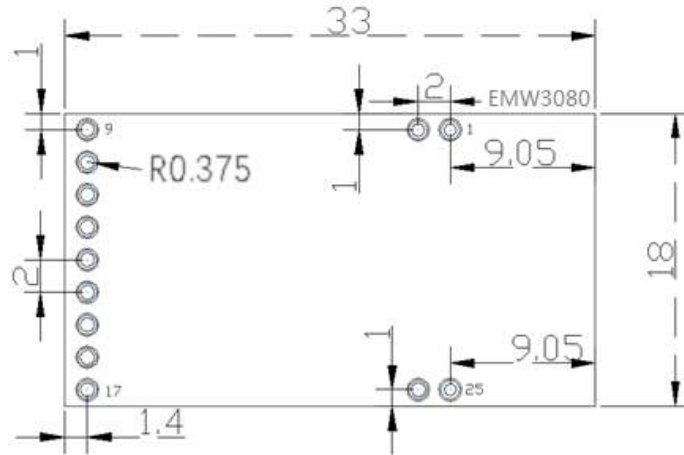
Stamp hole package size (mounting pad, unit: mm)
